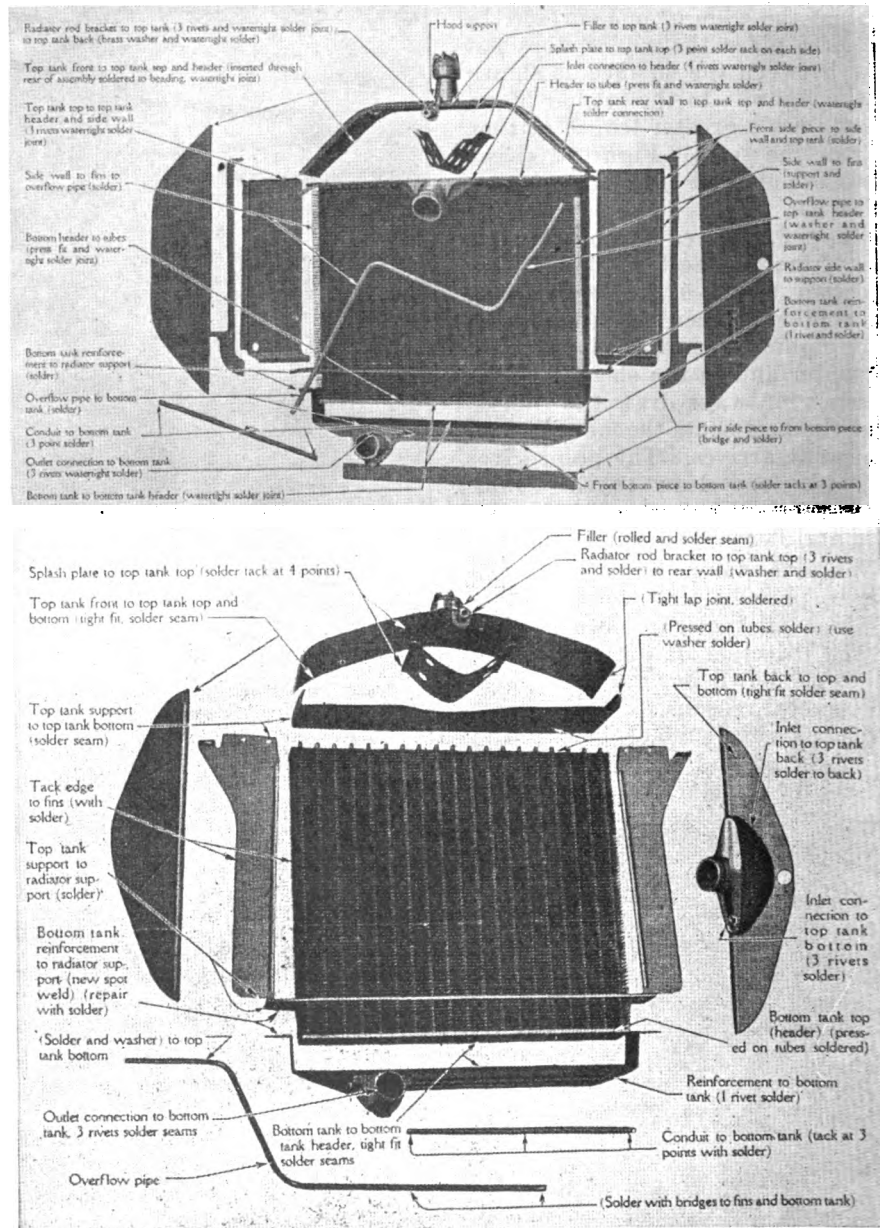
THE PARTS OF A NEW AND OLD STYLE FORD RADIATOR AND THE MANNER OF ATTACHING THEM
